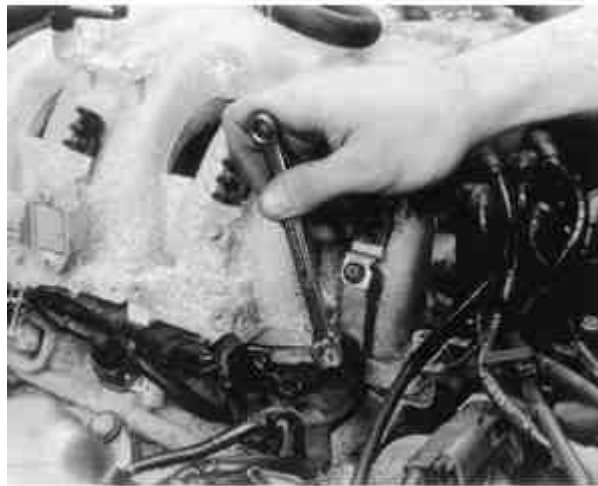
Using a hex-type socket, remove the intake manifold collector mounting bolts
